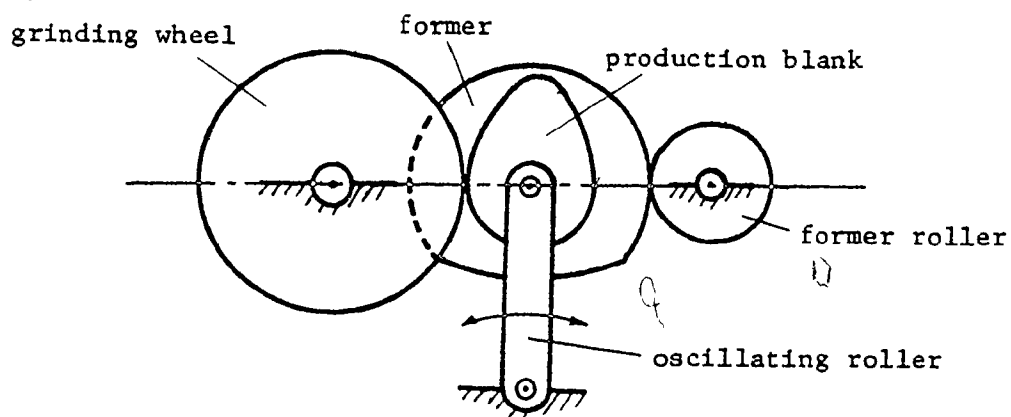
Diagram of a Cam Copy Machine Presented in [26].
